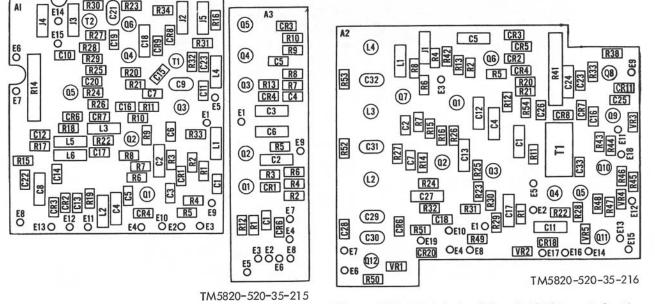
Printed circuit boards 1A5A1 and 1A5A3, parts location diagram.
